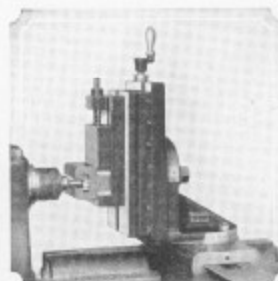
Milling Attachment fitted with Vertical Vise Fixture
